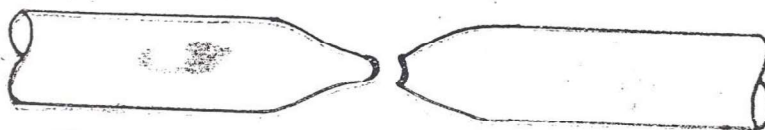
CUP AND CONE TYPE OF FRACTURE
